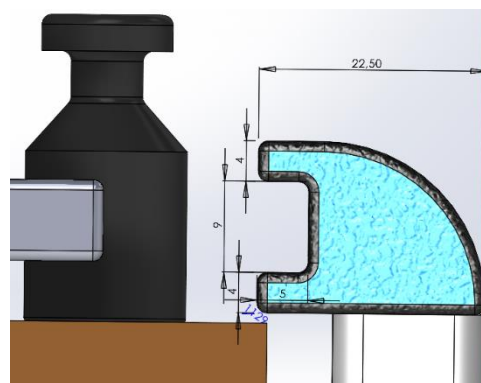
C-SHAPED GUIDE RAIL DIMENSIONS
